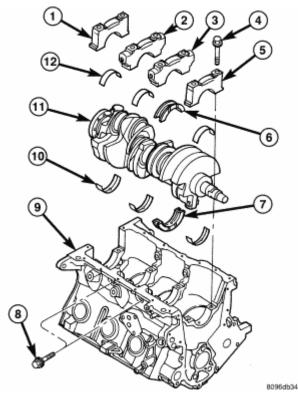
Crankshaft & Block - 3.8L Courtesy of CHRYSLER LLC
